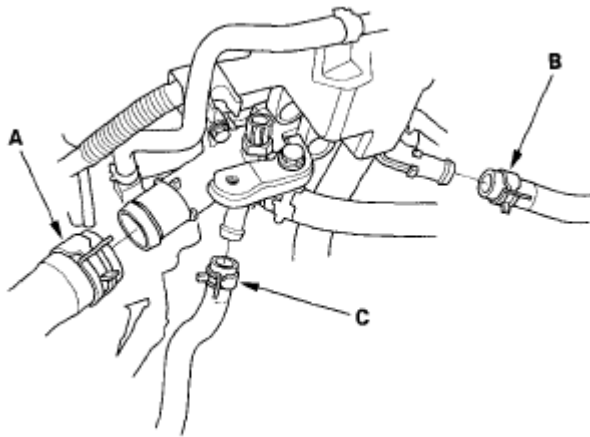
Identifying Upper Radiator Hose And Heater Hose - A/T Model
